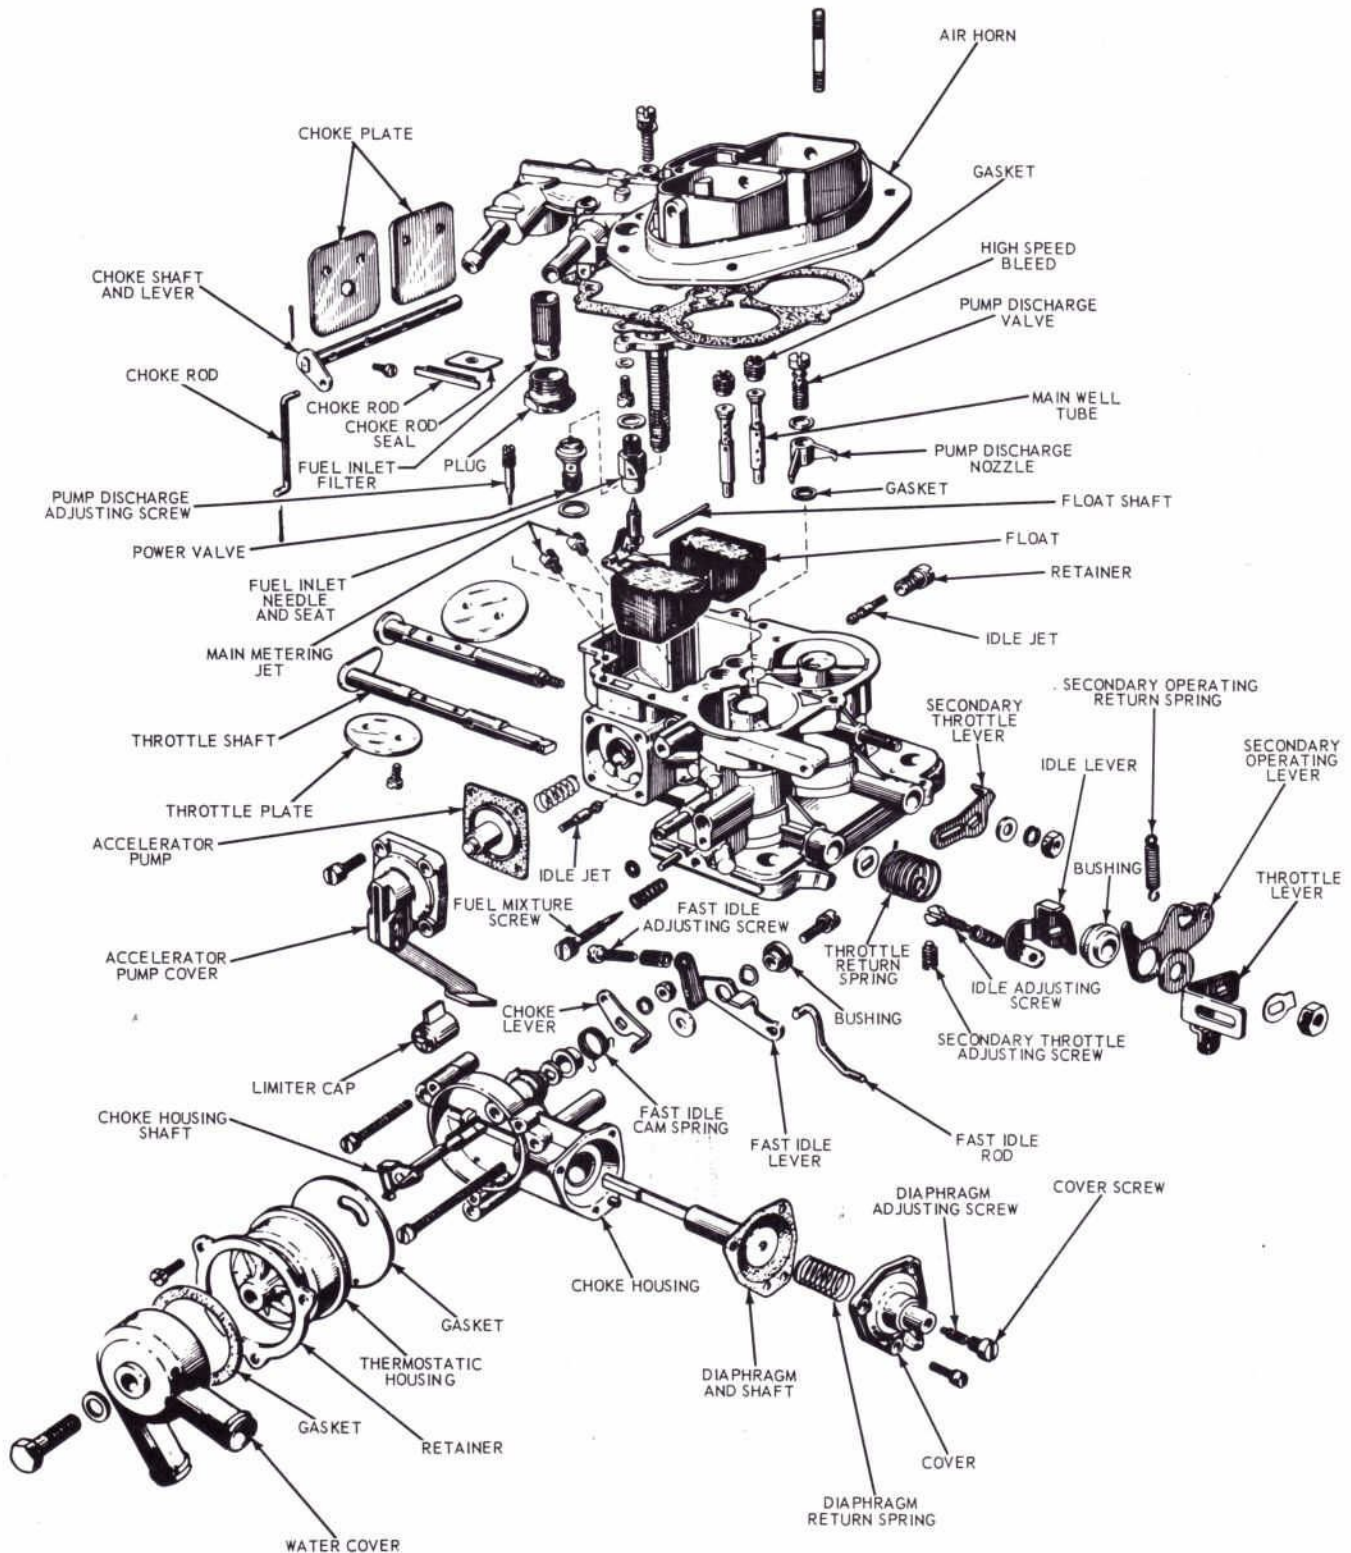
Exploded View of Autolite Model 5200-C Carburetor
